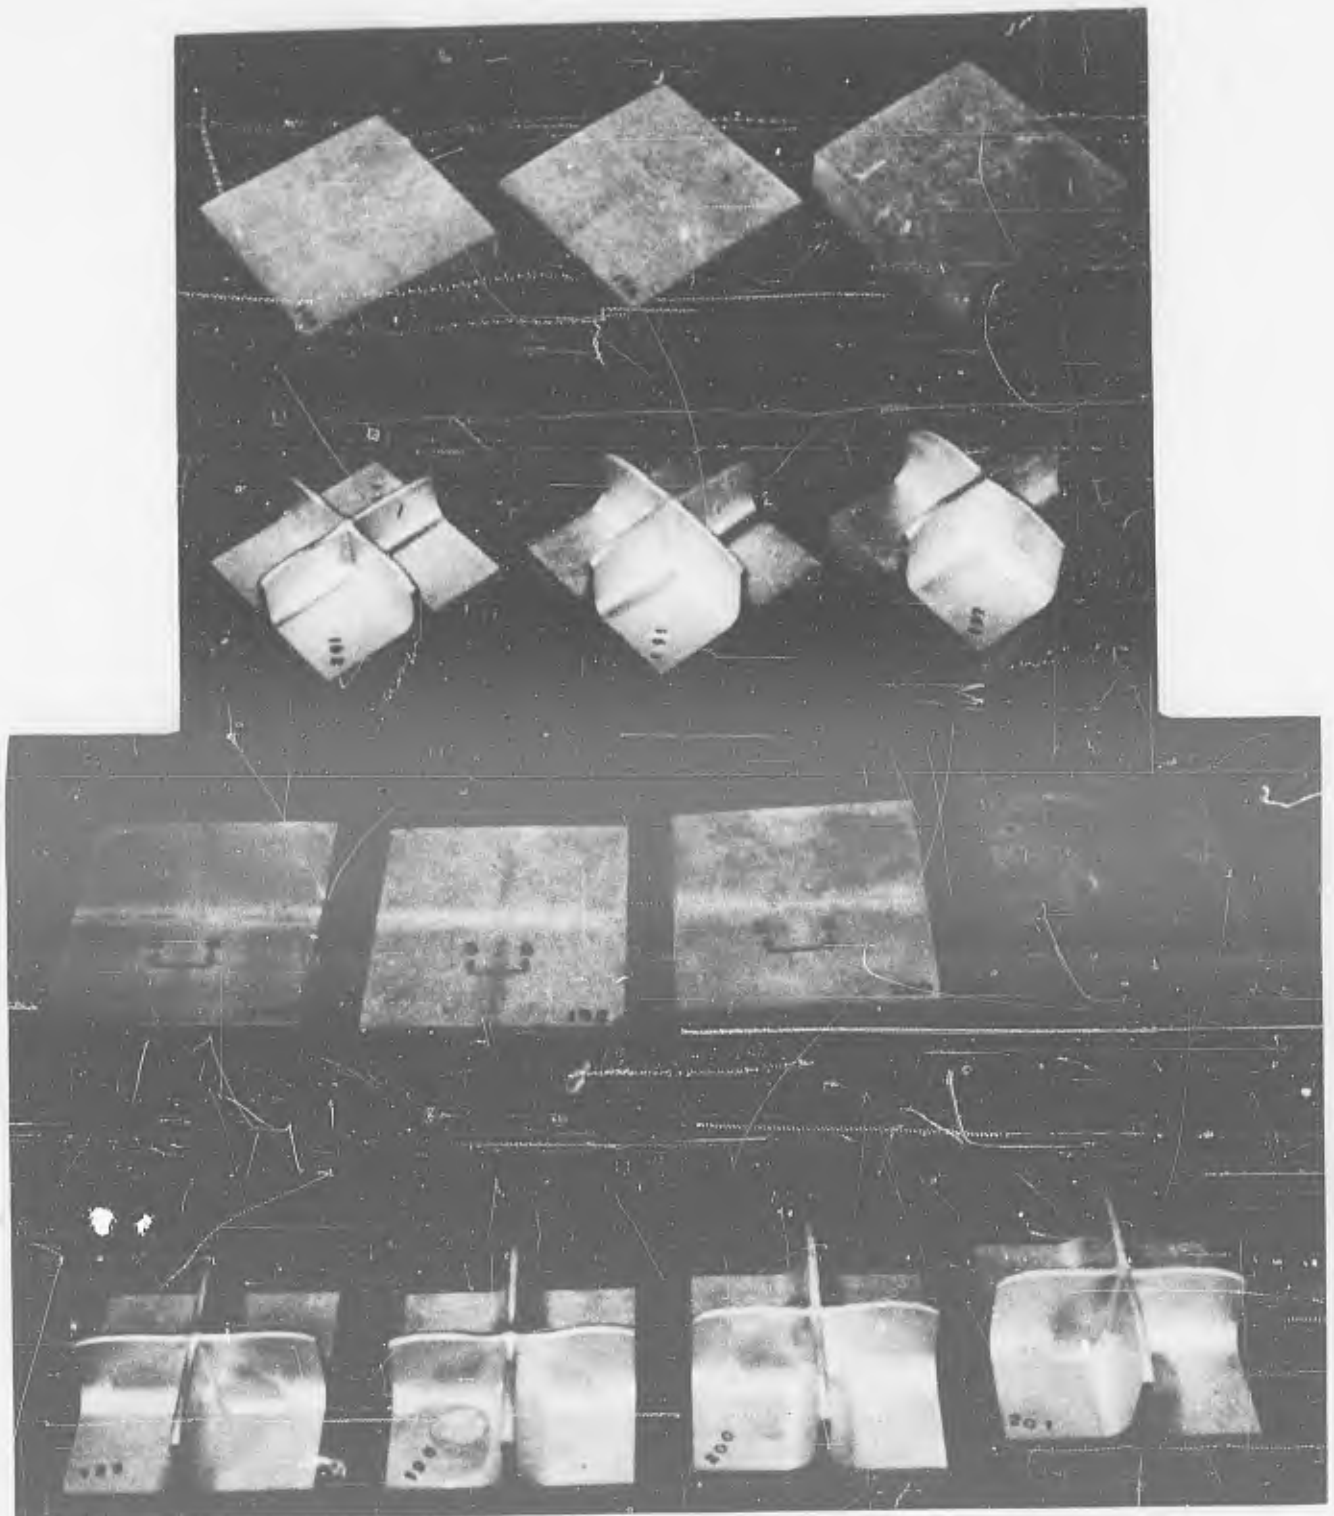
Forging die insert blocks used to produce test parts (Potomac "M" Tool Steel heat treated to 230,000 to 250,000 psi ultimate tensile strength).
